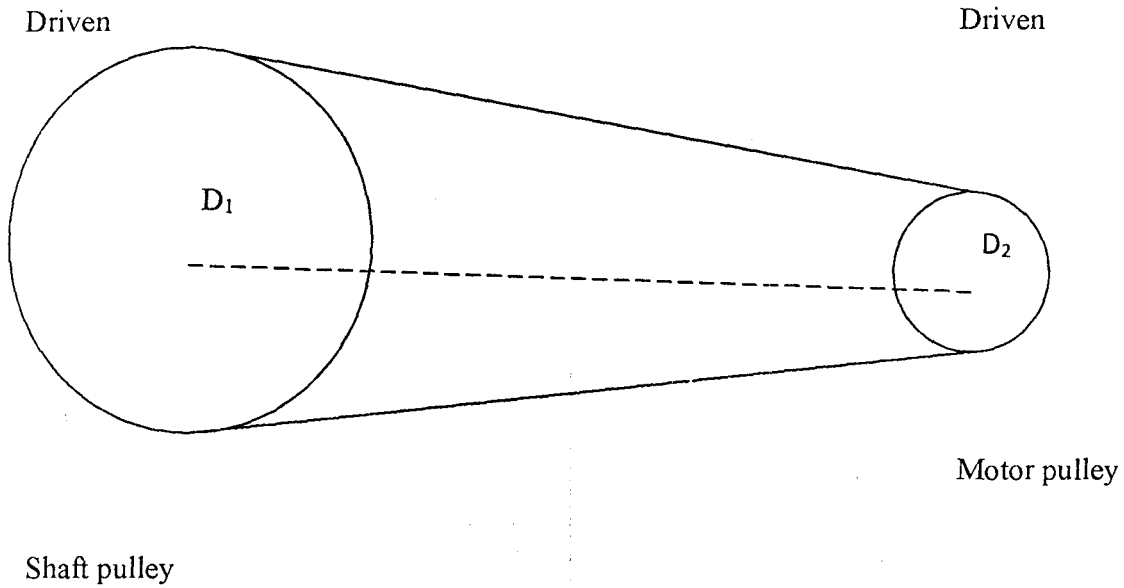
Motor-Cylinder Pulley Belt Arrangement
